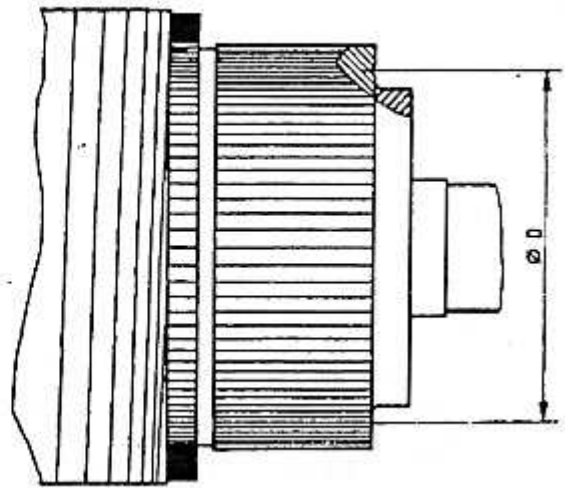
C Minimum machining diameter for moulded and "V" ring commutators
